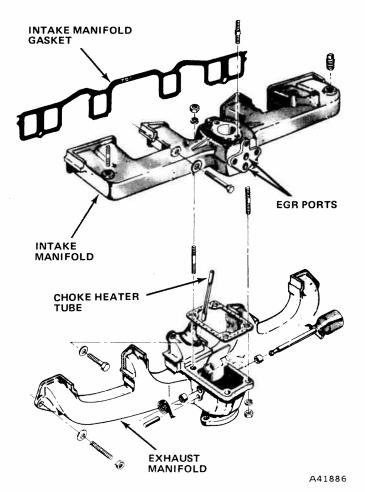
A-12 Intake and Exhaust Manifold Assembly
